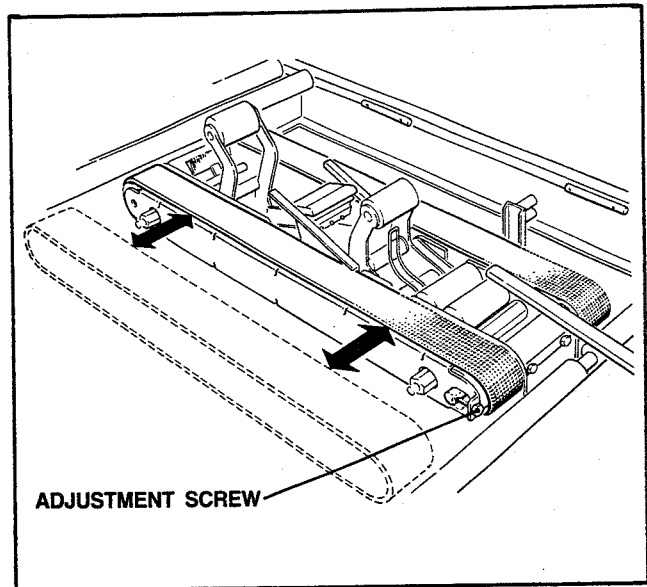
C - Box Drive Belt Replacement - Bottom Taping Head
